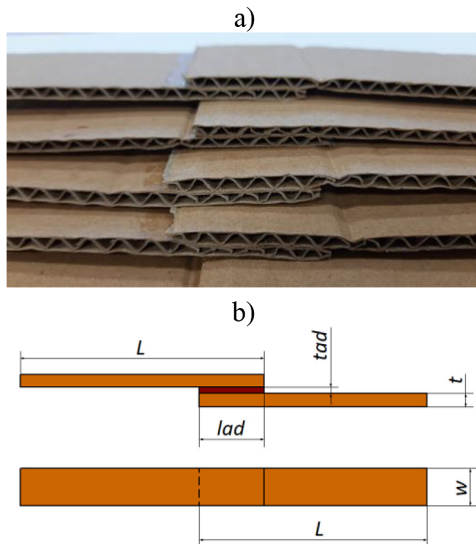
The three-layer corrugated cardboard (B flute) cardboard adhesive joints samples: a) view of several joints, b) parametric scheme
